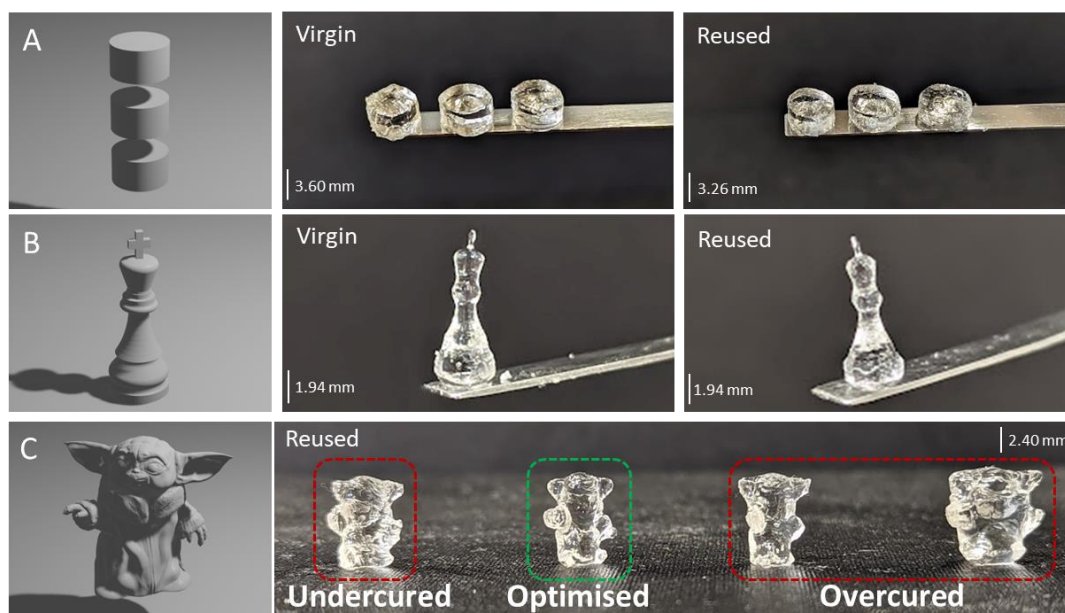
CAD Designs and parts printed with reused and virgin PG6-acrylate.
